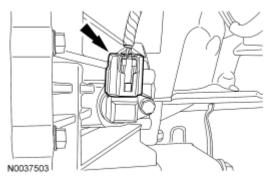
Locating Output Shaft Speed (OSS) Sensor Electrical Connector Courtesy of FORD MOTOR CO.
